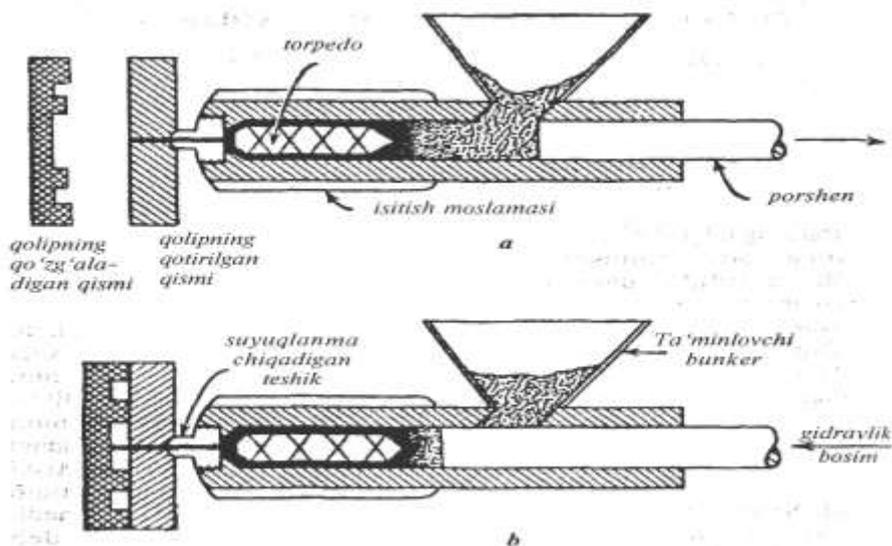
Casting machine scheme: a-open mold, b-closed mold
